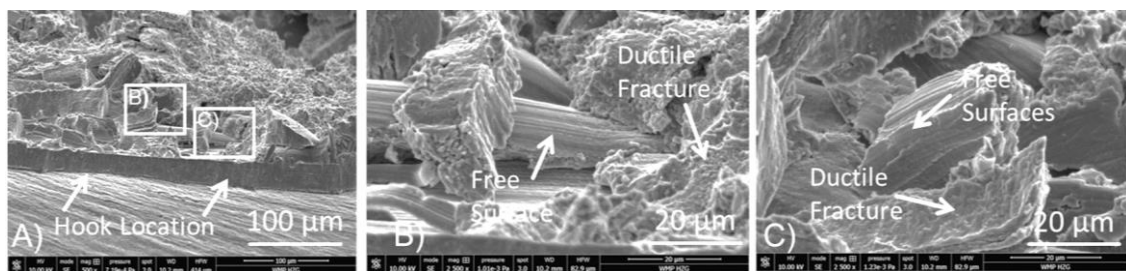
Cross-section with typical flaws and voids C5: A) Fracture surface after lap shear test; B) Fracture surface with dimples and free surfaces; C) Fracture surface with dimples and free surfaces.
